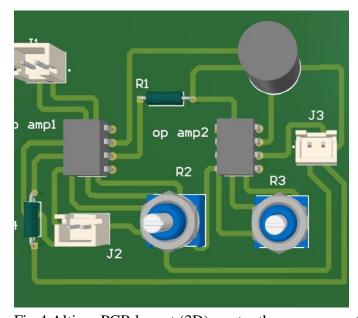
Altium PCB layout (3D) sawtooth wave generator
